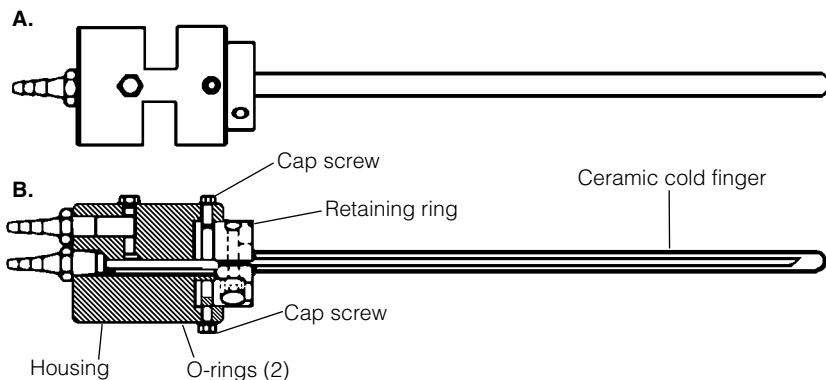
A) Heat exchanger assembly. B) Section view of the heat exchanger assembly.
